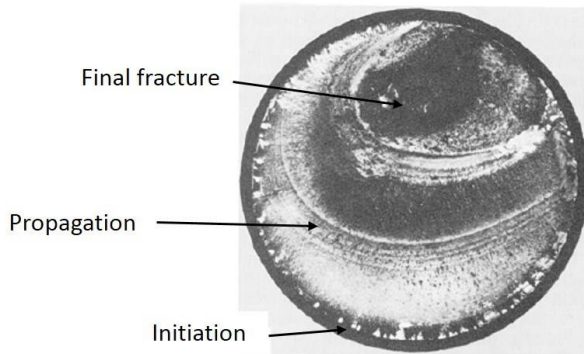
Fatigue fracture characteristics: Initiation, Propagation and Final fracture zones (4)
